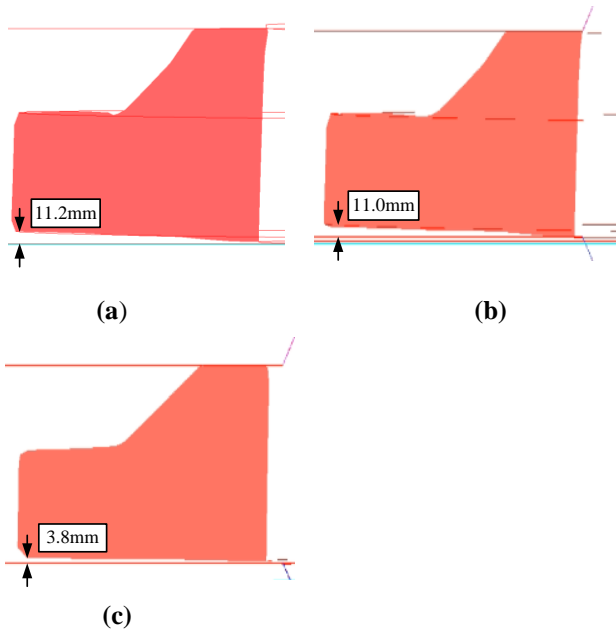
Flange lifting amount; (a) position = -5mm (b) position = 0mm, (c) position = +5mm
